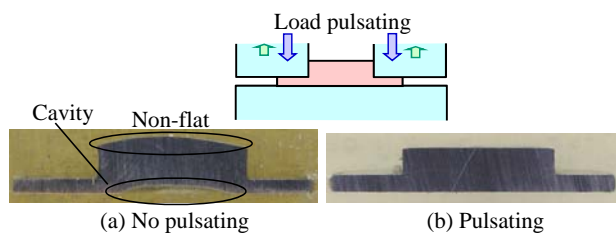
Prevention of cavity in centre of bottom and flat upper and lower surfaces of formed boss by load pulsation in forging of stainless steel plate.
